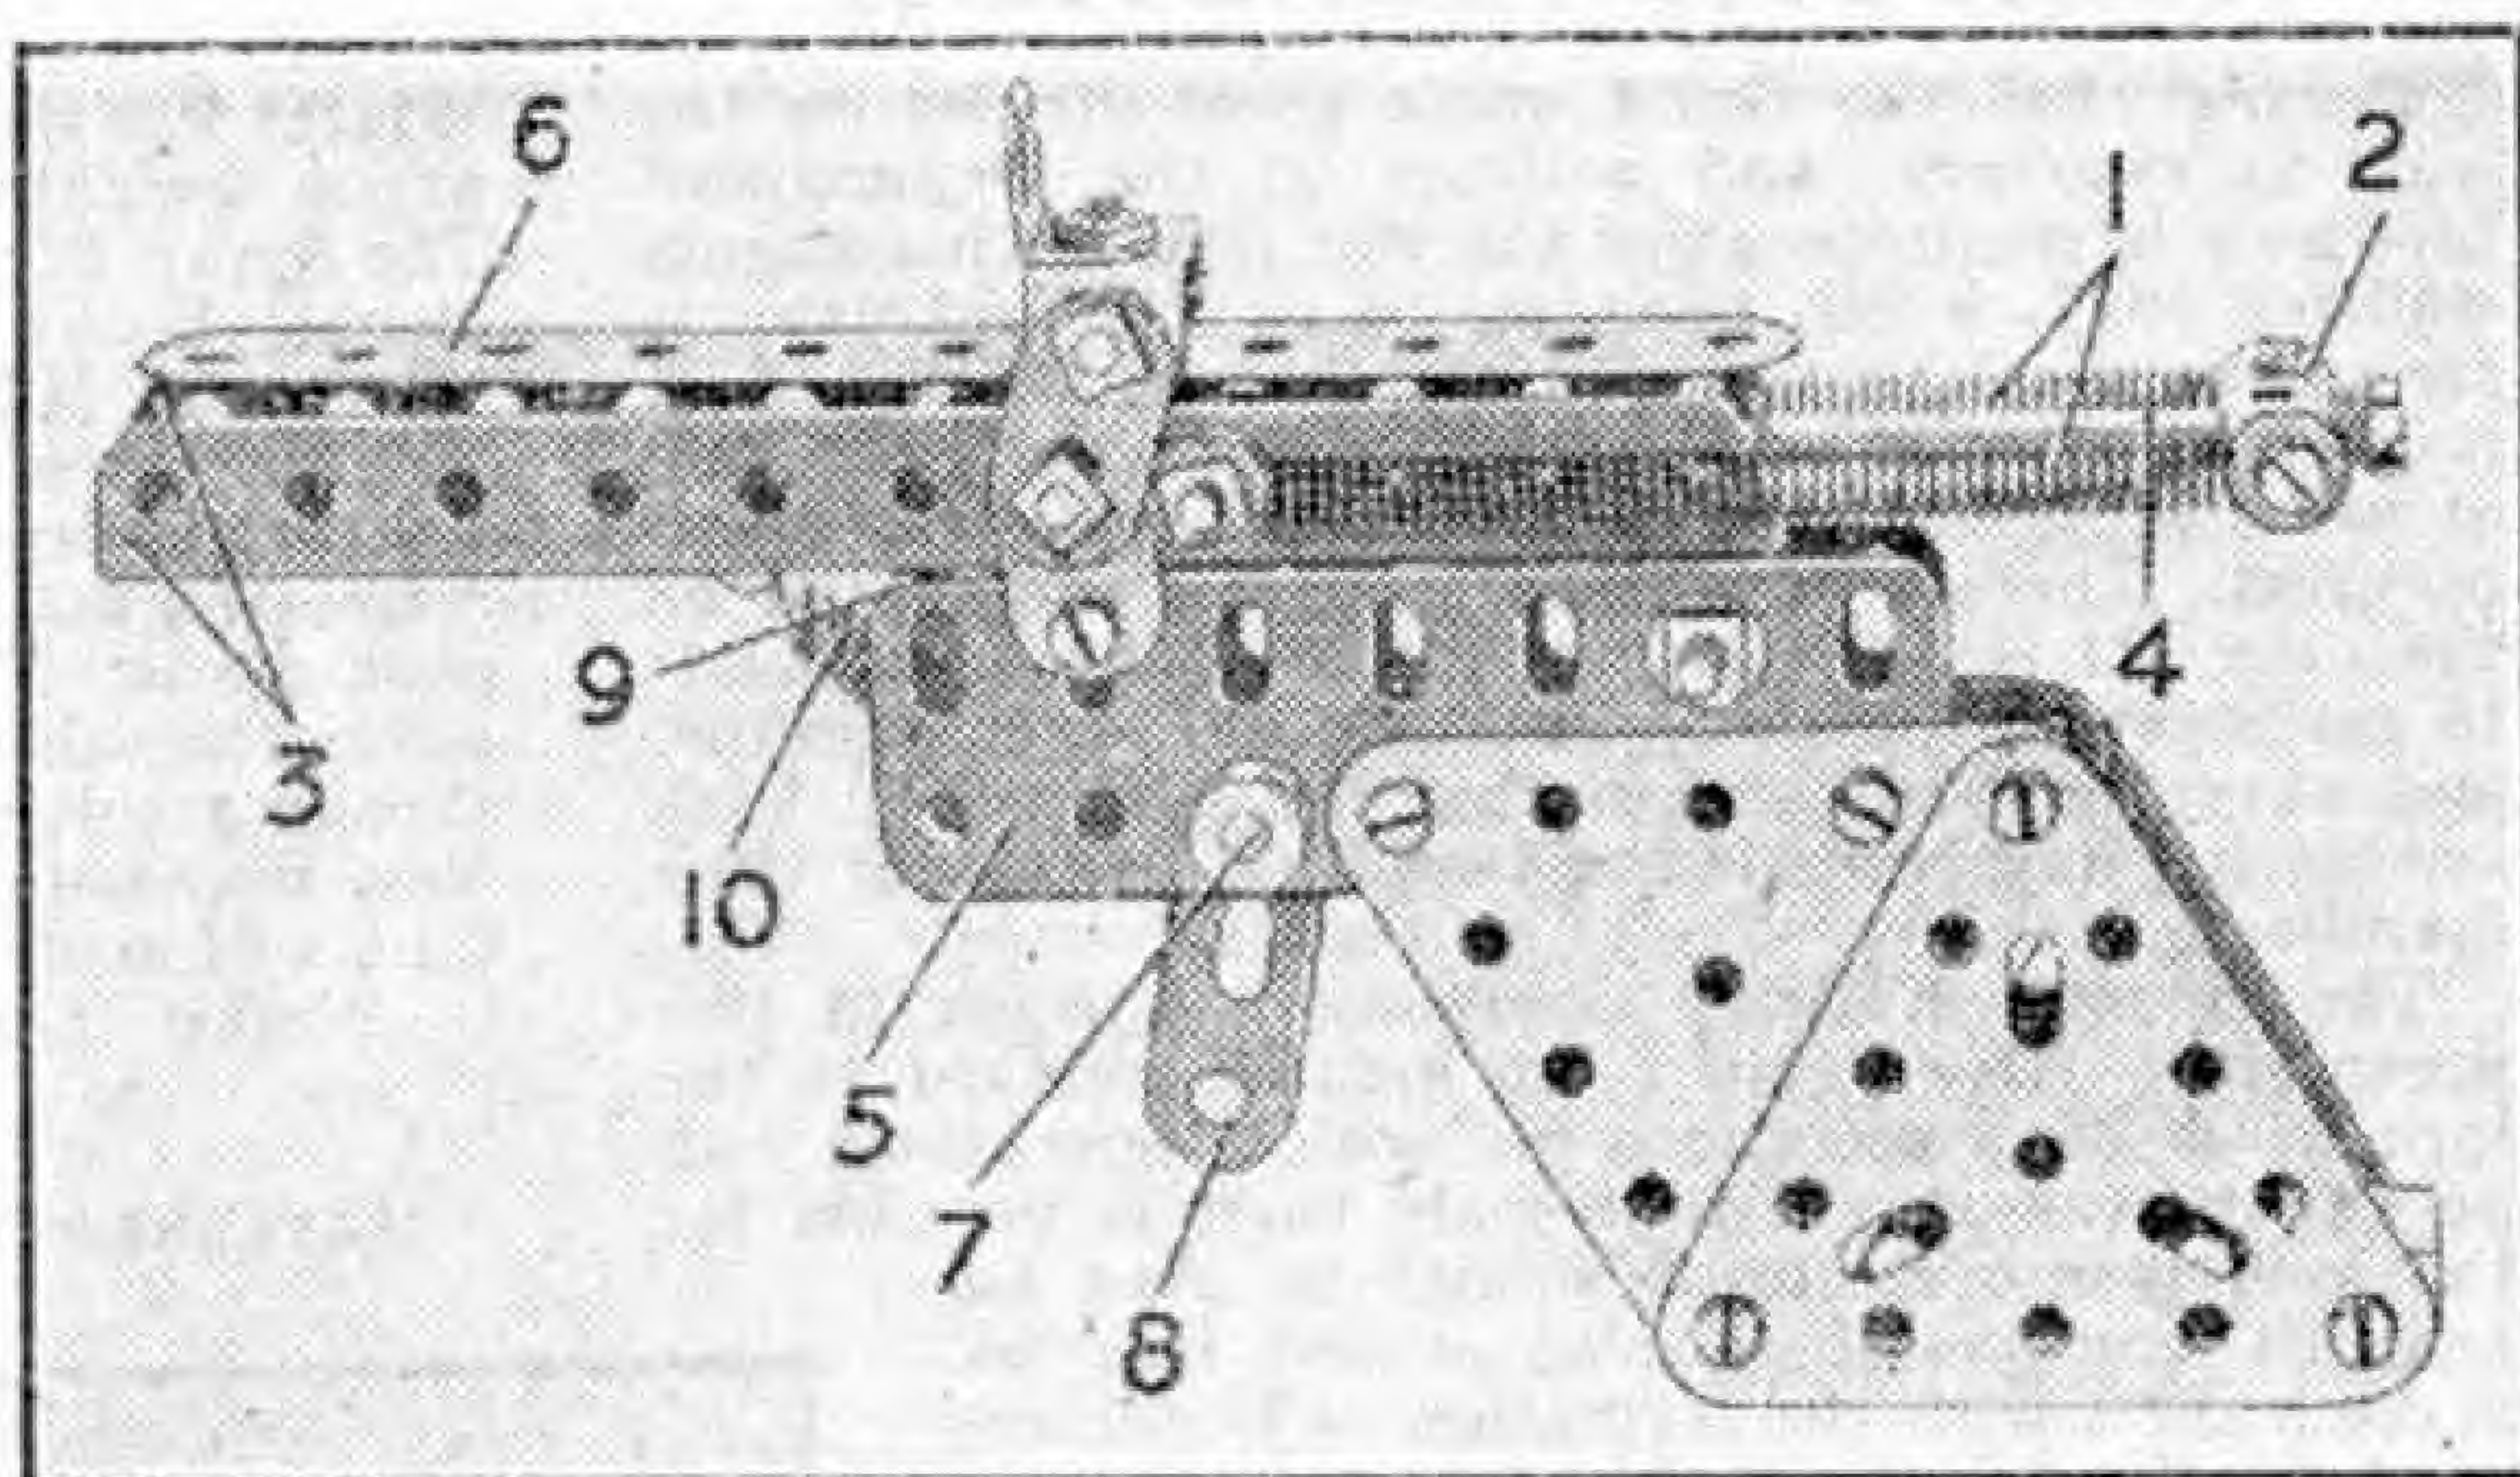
A spring-operated pistol, which will "fire" peas and similar missiles.
